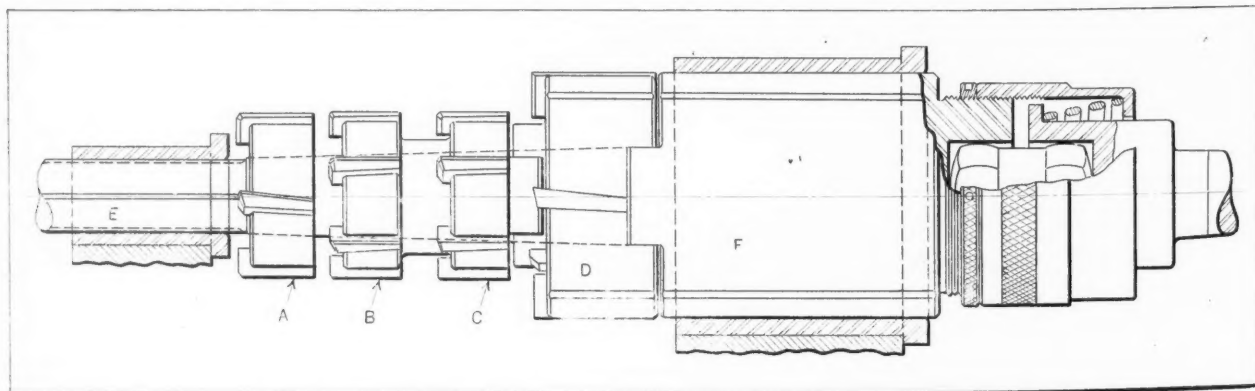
Tool Assembly which Takes Three Successive Boring Cuts on Holes *a*, Fig. 6, Faces End *b*, and Chamfers Corner *c
